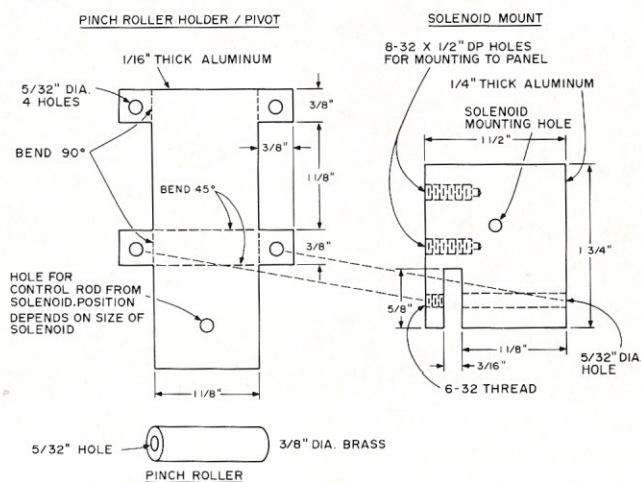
Dimensions for pinch roller, pinch roller holder, and solenoid mount.
